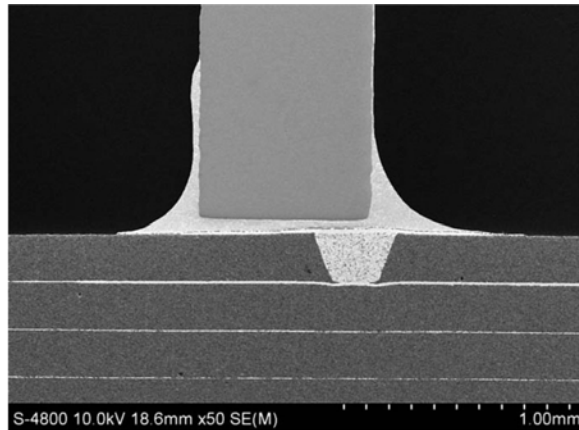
Cross sectional view of a seal frame soldered to a thin film covering a FTTF solid wall structure used in a prototype.
